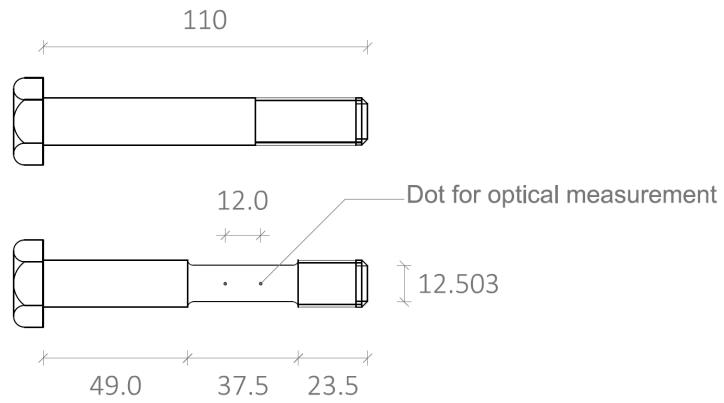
Original bolt dimensions and dimensions specimen used in tensile test
